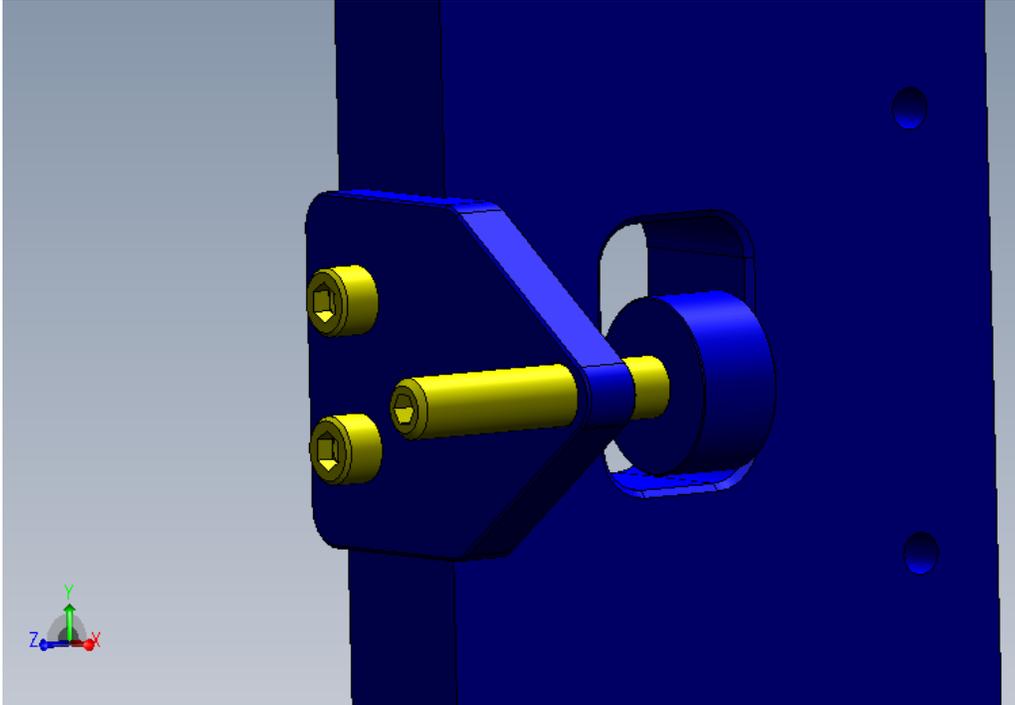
Mirror ECD mounted in the bracket onto the Side.
